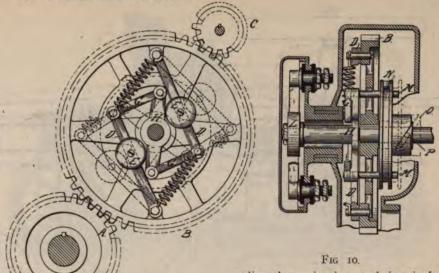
brushes being supported by studs clamped into the casing of the commutator wheel by means of insulating washers and bushings. The electrical connections are made by means of clamp screws at the back of the casing. It is, of course, evident that if the commutator disk is slightly rotated around the cam shaft, either by hand or by the centrifugal governor, the spark will occur at a different period with the relation to the cycle of the engine. The whole mechanism is enclosed, as best shown in
